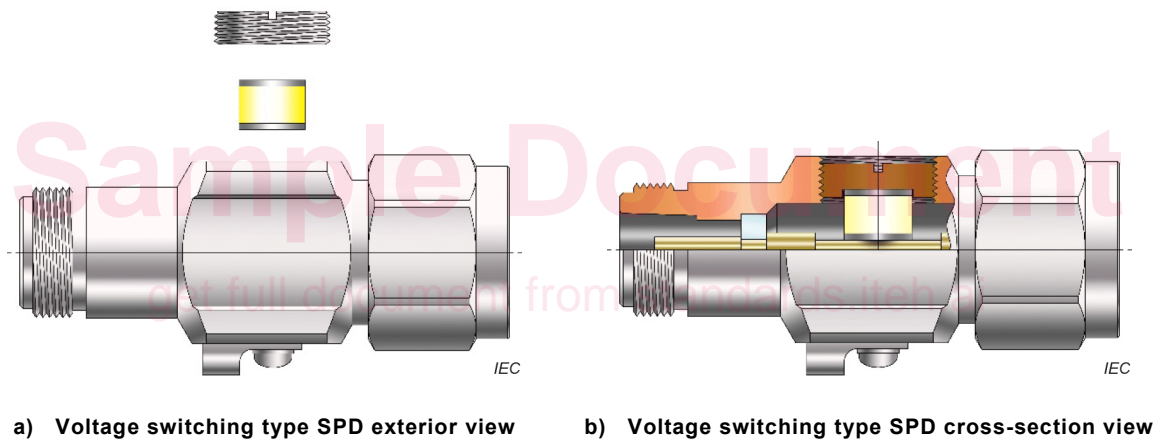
Coaxial adapter for surge protection device with gas discharge tube
